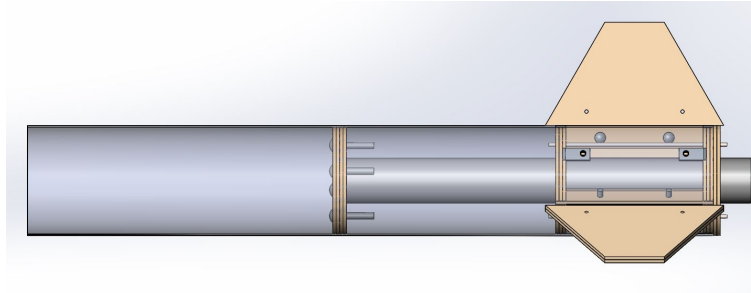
CAD Model of the Fin Can using a Removable Fin Design
